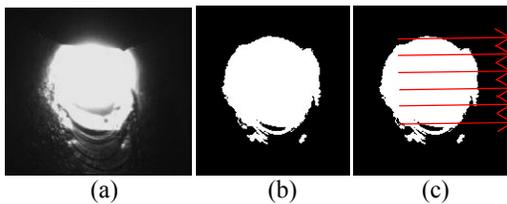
(a) Weld pool image as captured, (b) BW thresholded conversion image (c) Measuring weld pool edge process
